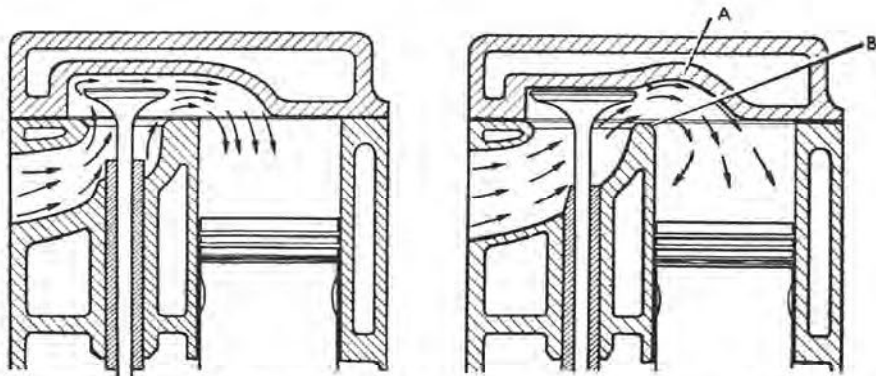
(left) Poor gas-flow conditions in side-valve inlet system. (Right) Improved gas-flow with larger inlet valve, re-shaped port and larger throat.
